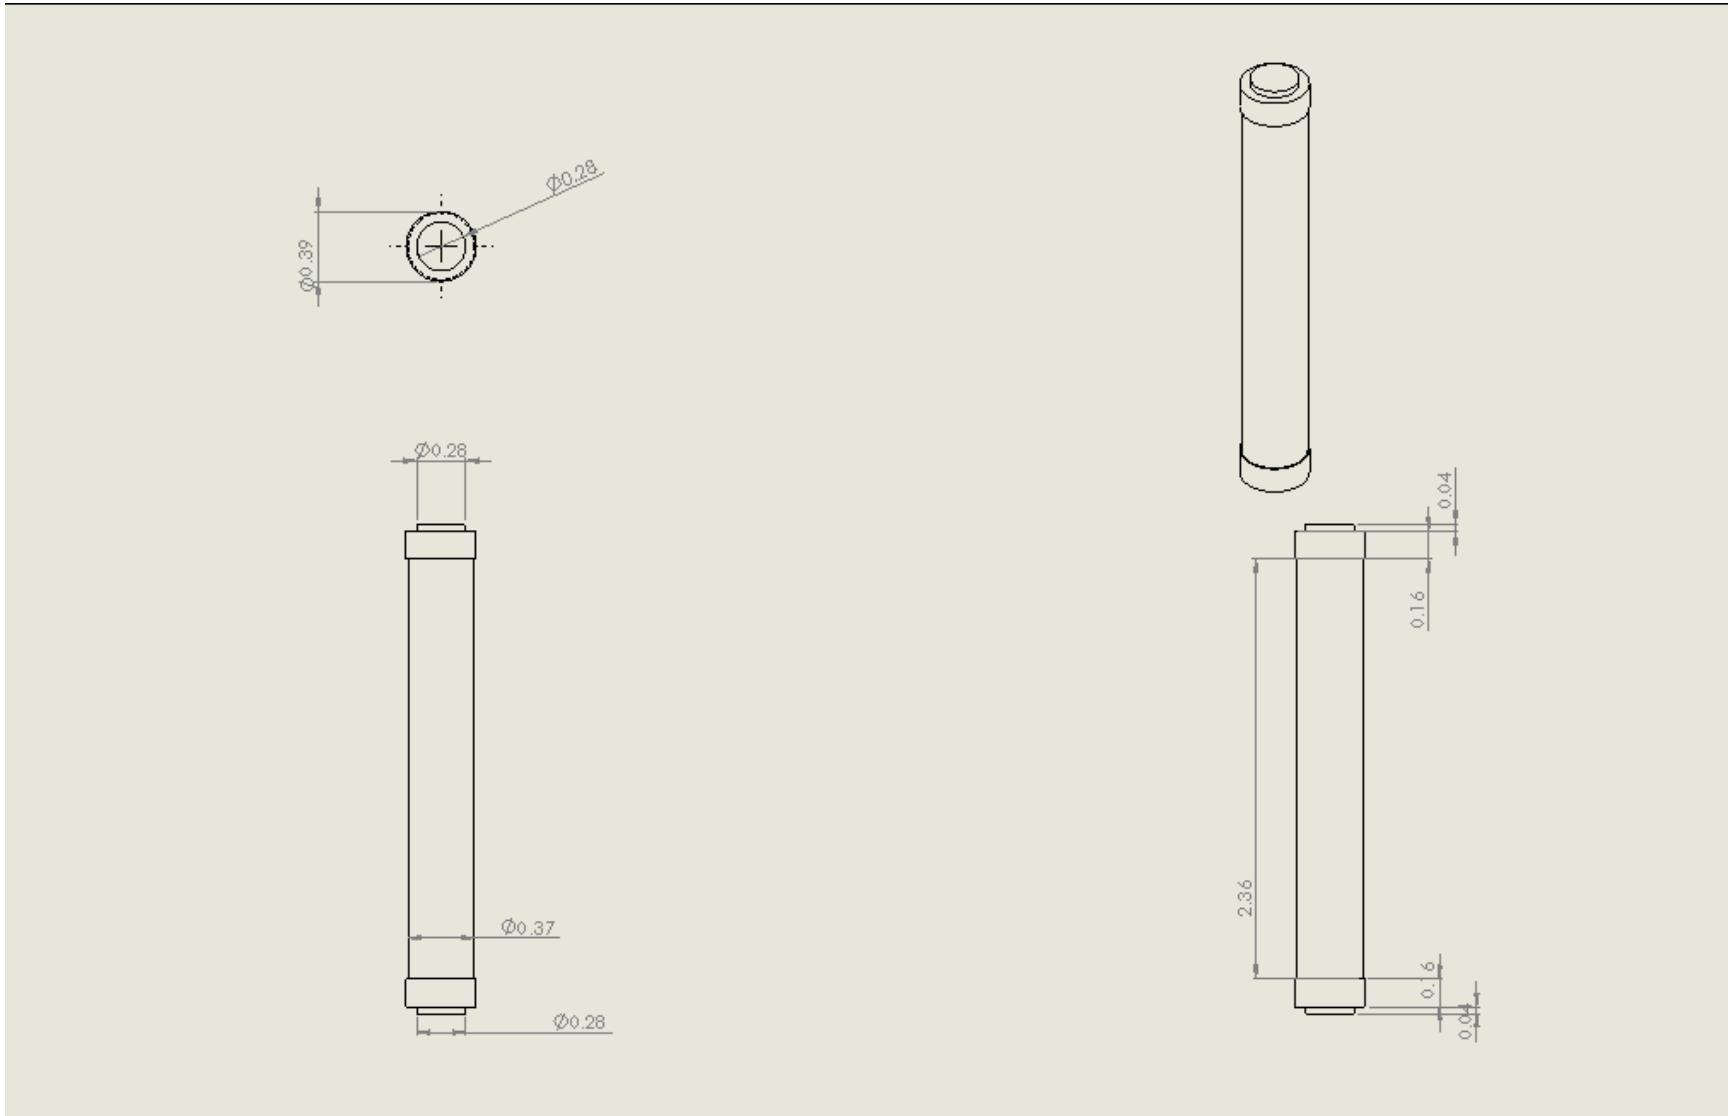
Part 1004 (Magnetorquer Rod) Part Drawing
